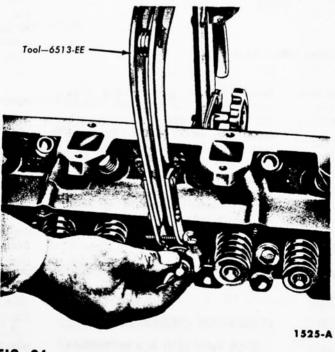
Valve Spring Retainer Locks—Removal or Installation
